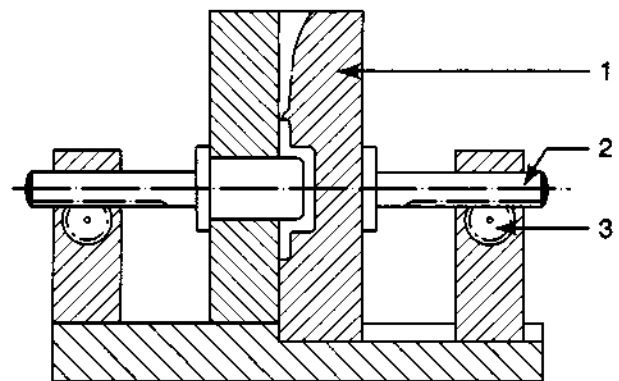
D1 A typical permanent mold. 1) movable mold half, 2) rack gear, 3) pinion gear. (from Davidson, *Handbook of Precision Engineering*, McGraw-Hill, New York)
